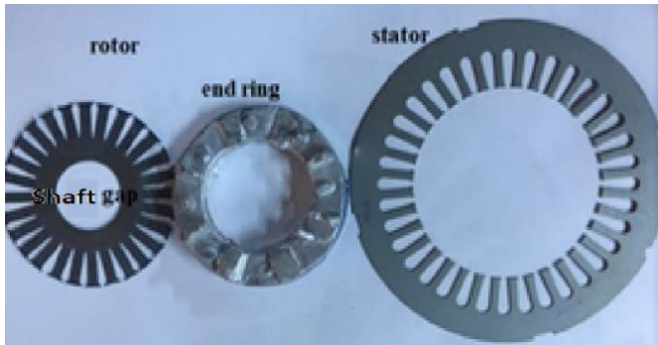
The geometrics view of the rotor plate, rotor short circuit ring (end ring), and stator sheet plate.
